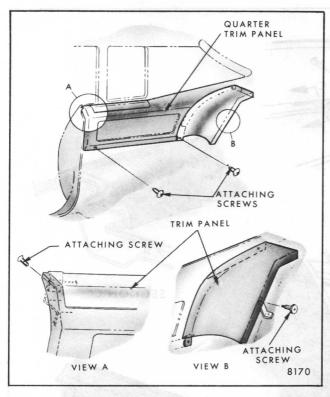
Quarter Trim Assembly Attachment - Cadillac "E-47" Styles
